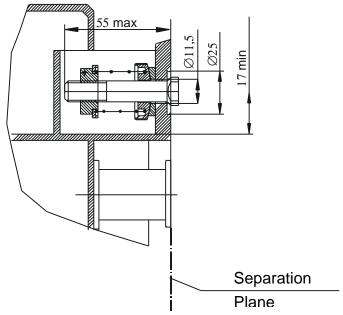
Start-1 LV standard adapter. Cross Section B – B.
